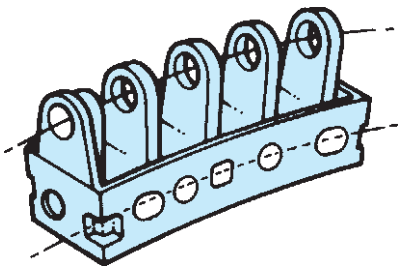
Warped overhead camshaft cylinder head. If the gasket surface is machined to be flat, the camshaft bearings will still not be in proper alignment. The solution is to straighten the cylinder head or to align bore the cam tunnel.
